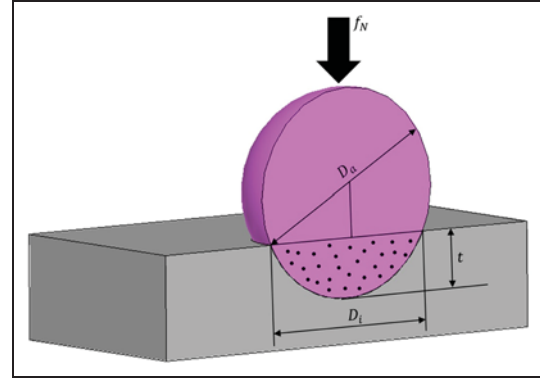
Schematic of cross-sectional view of an active abrasive particle indented into surface of workpiece.
